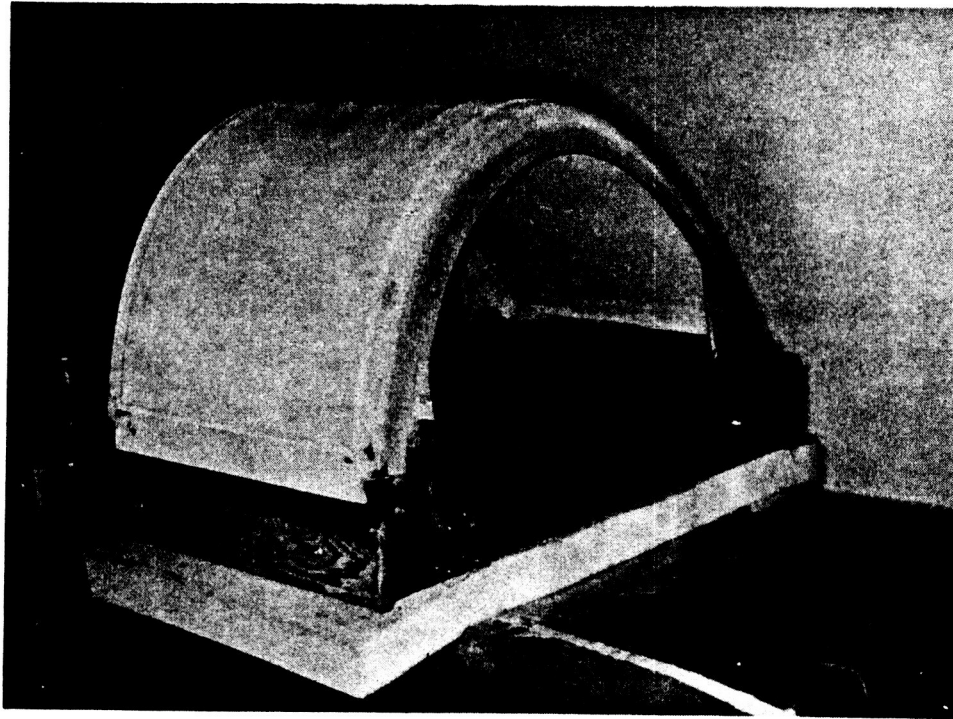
ACOUSTIC TEST LEADING EDGE AND TEST FIXTURE
